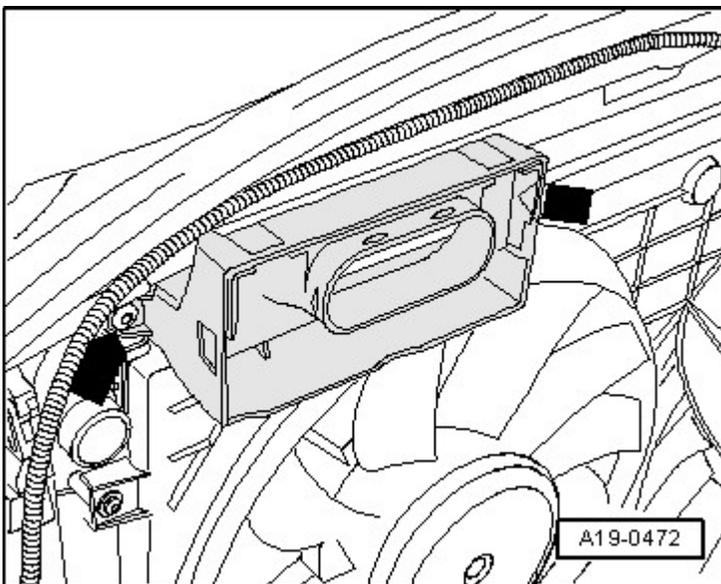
Identifying Air Guide Screws -Arrows- And Air Guide
